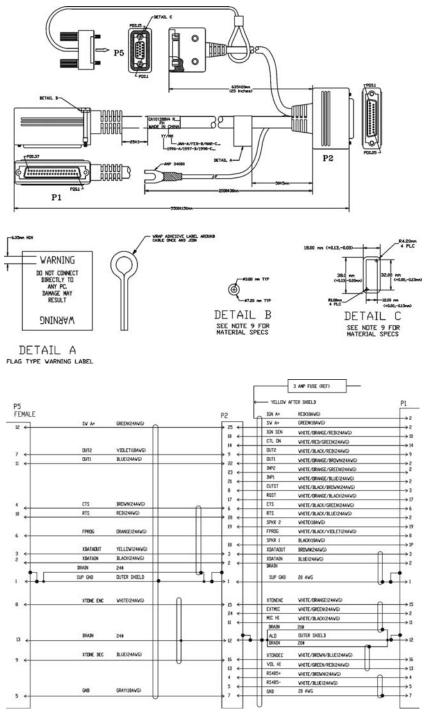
Remote Extended Option Control Cable (CA101288V4)
